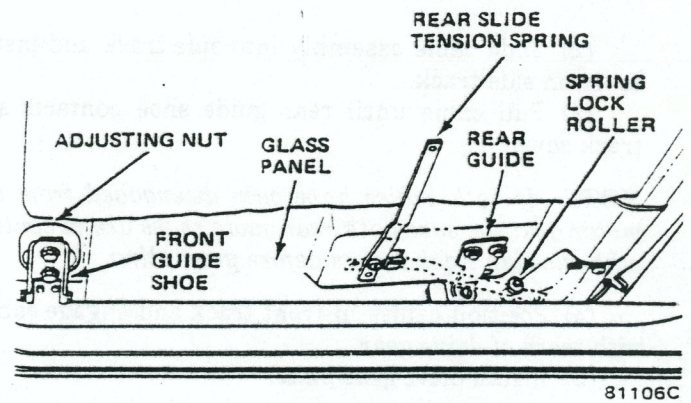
L-13 Front Guide Shoe and Rear Tension Spring
